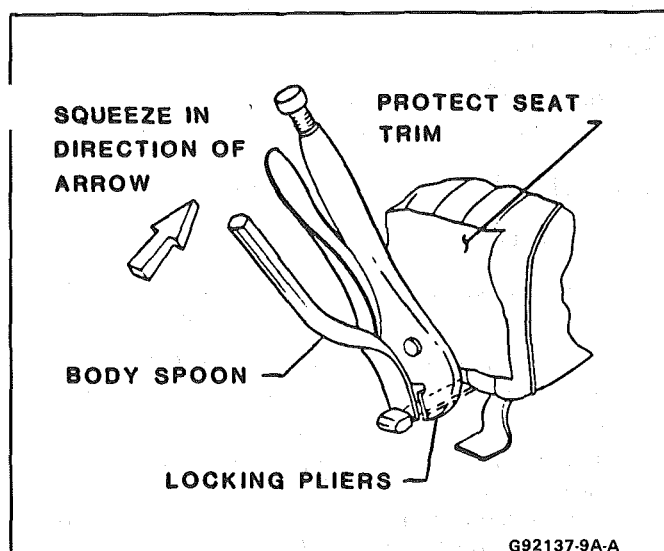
Front Seat Adjuster Control Arm Knob Removal and Installation
